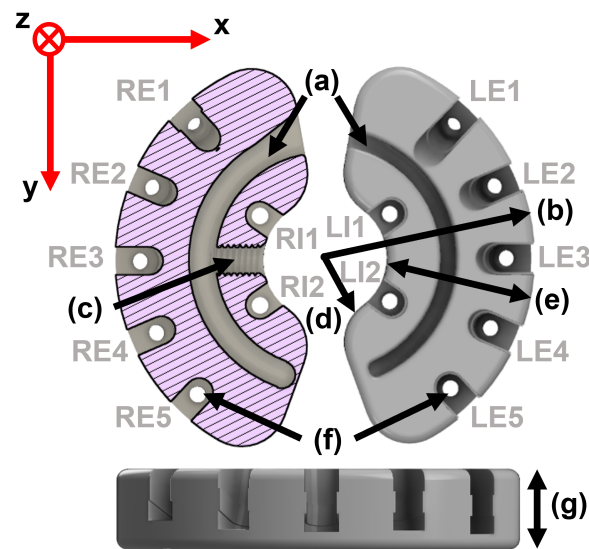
Components of the M1 caps and IS needle identification. (a) 3D printed SR channel; (b) Outer radius; (c) 3D printed fixation screw thread; (d) Inner radius; (e) Cap's width; (f) GT slots; (g) Cap's thickness.
